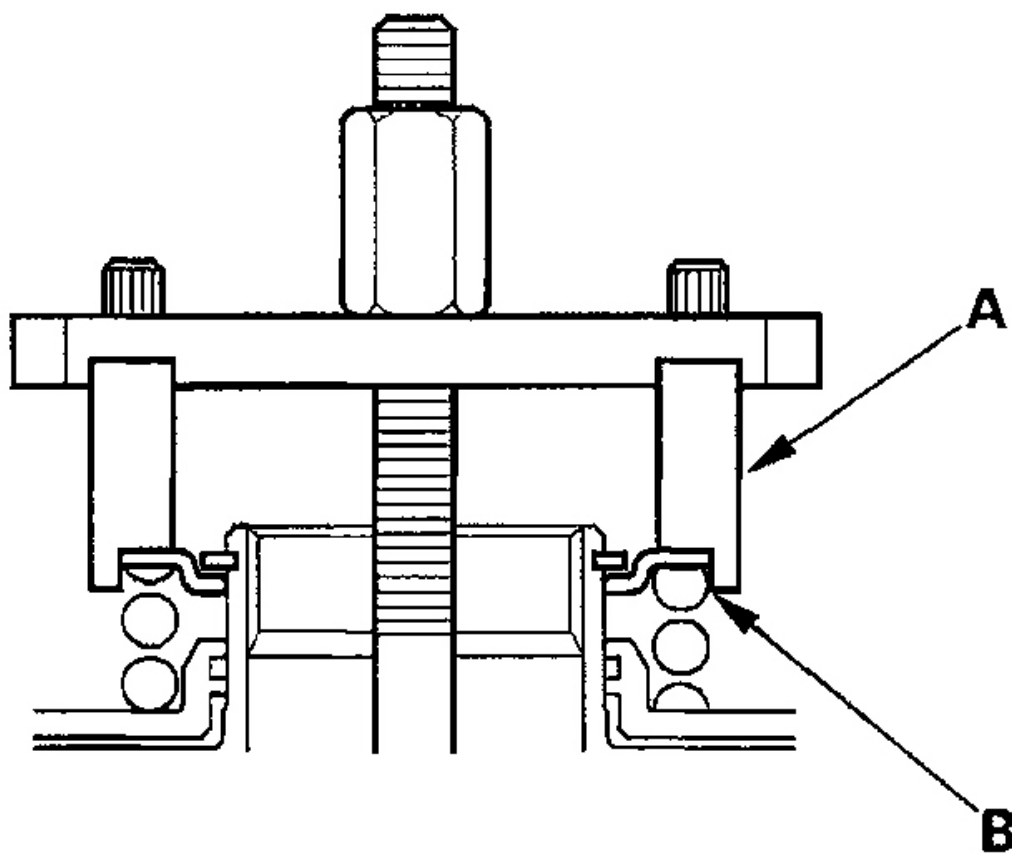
Installing Special Tools On 4th/5th Clutch Assembly & 1st clutch
